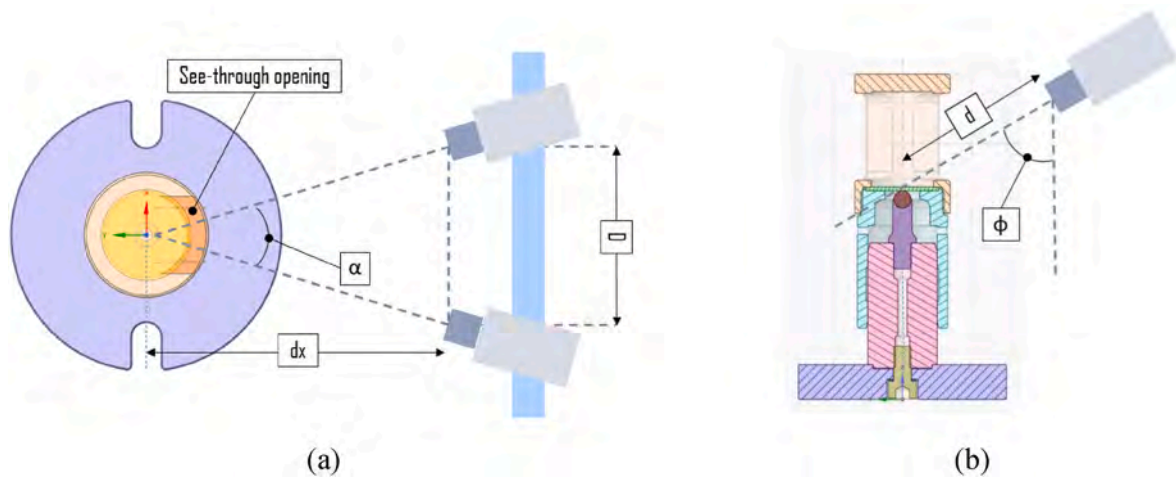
Schematically (a) top and (b) side view of the test set-up with relevant dimensions.
